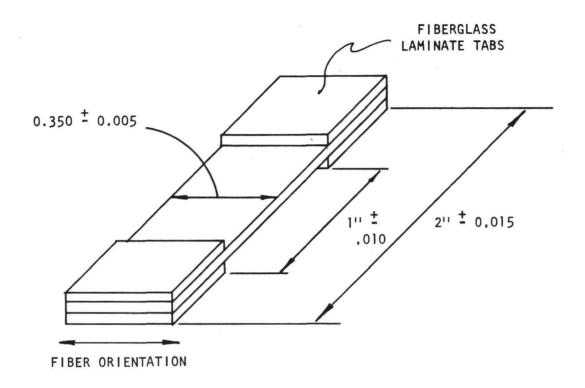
LONGITUDINAL TENSILE SPECIMEN
